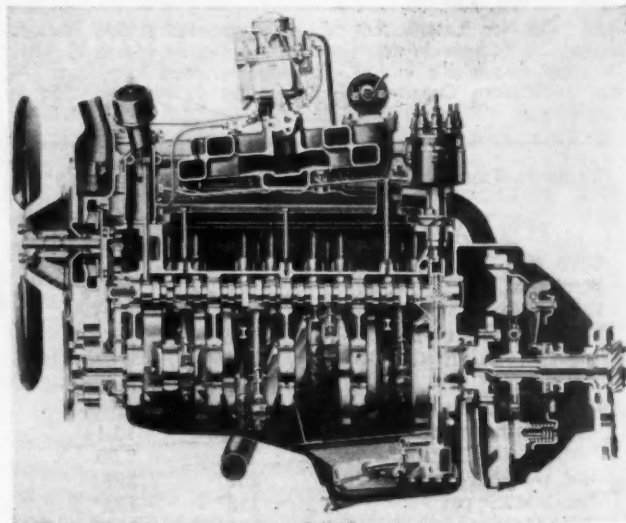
Shown here is how the internal parts—including crankshaft, bearings, rods, and camshaft—are compactly arranged. In front is the dual water pump with integral bypass from the thermostat housing. Also indicated is the division tract of the intake manifold to show the ribbed sump which traps excess fuel in cold starting and provides ample hot-surface area for quick warmup. Vertical distributor and oil pump drive are at the rear section of the engine
